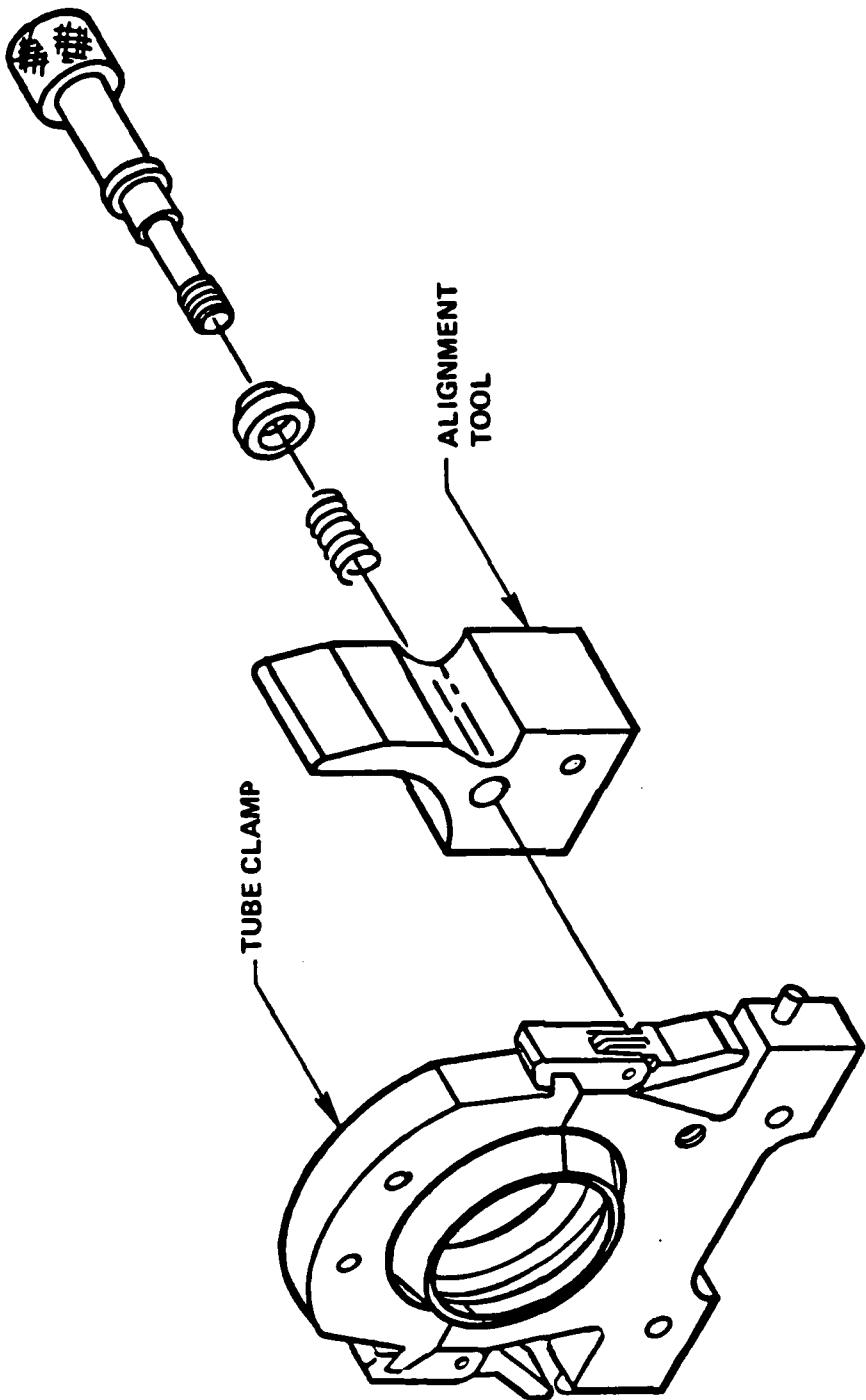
Isometric View of Tube Clamp and "Exploded" Alignment Tool
